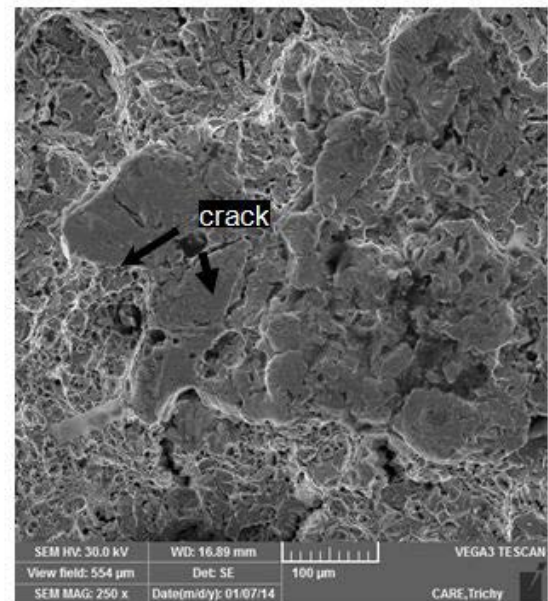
Fracture in Carburized specimen showing inter granular fracture with dimples.
